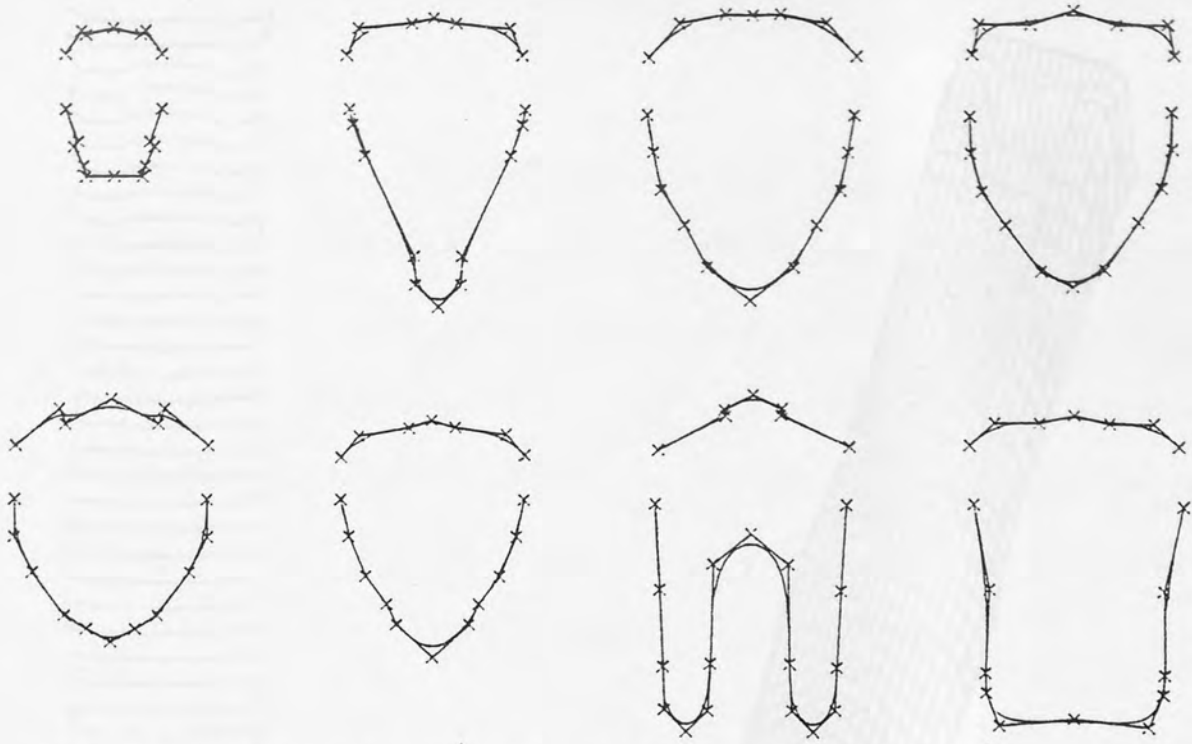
Cross-sectional Curves for Upper and Lower Parts of the Mould
